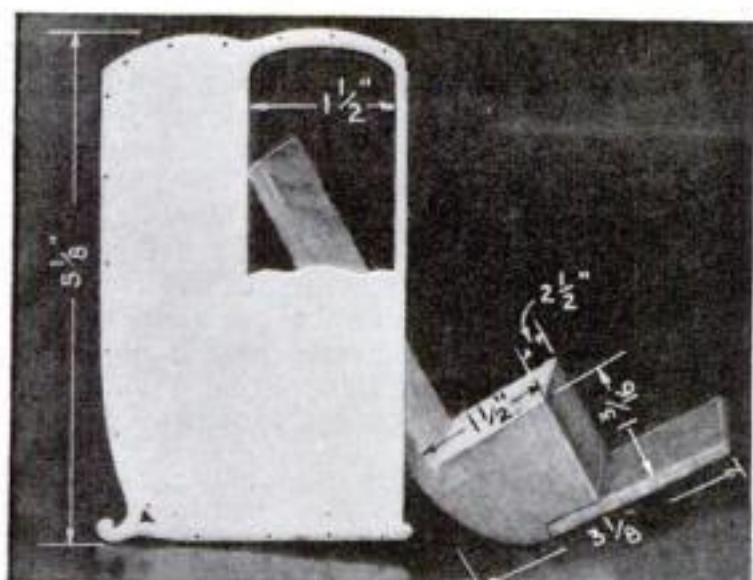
Back and bottom assembly with one side. If the sides are cut from metal that can be soldered, the railings are cut separately.
